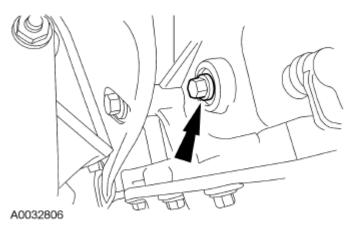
Locating Engine Plug Bolt Courtesy of FORD MOTOR CO.
